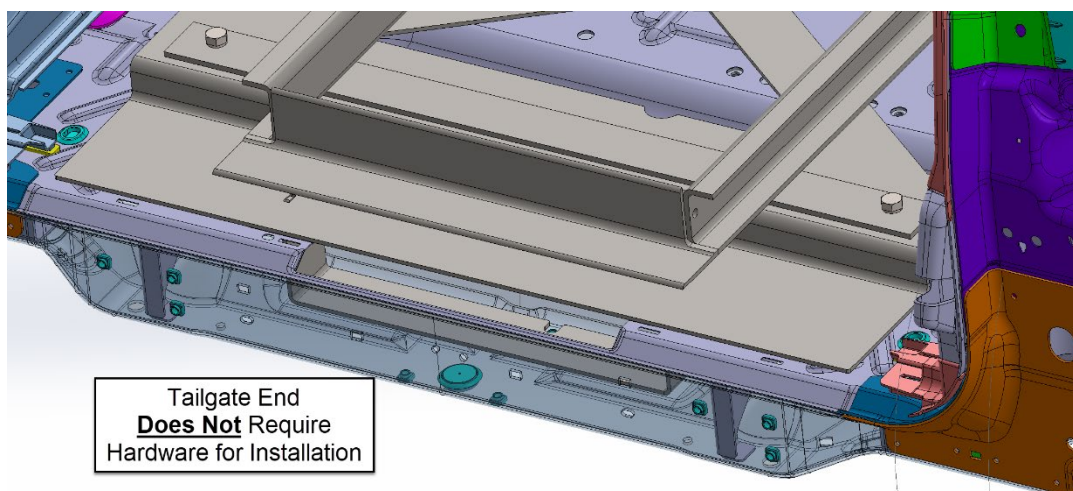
and Newer Expedition Bracket Tailgate End Installation (Anchor Frame Shown for Reference)
